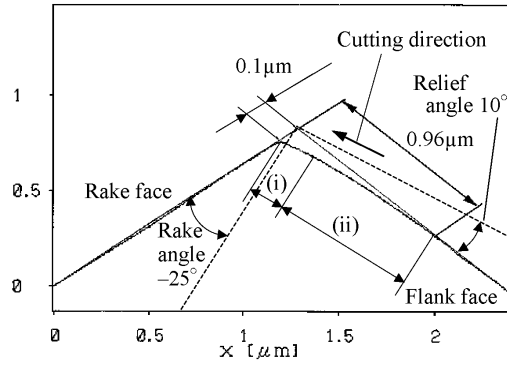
Cross-sectional profile of cutting edge of the tool with a radius of 11.61 mm at a cutting distance of 38.4 km
